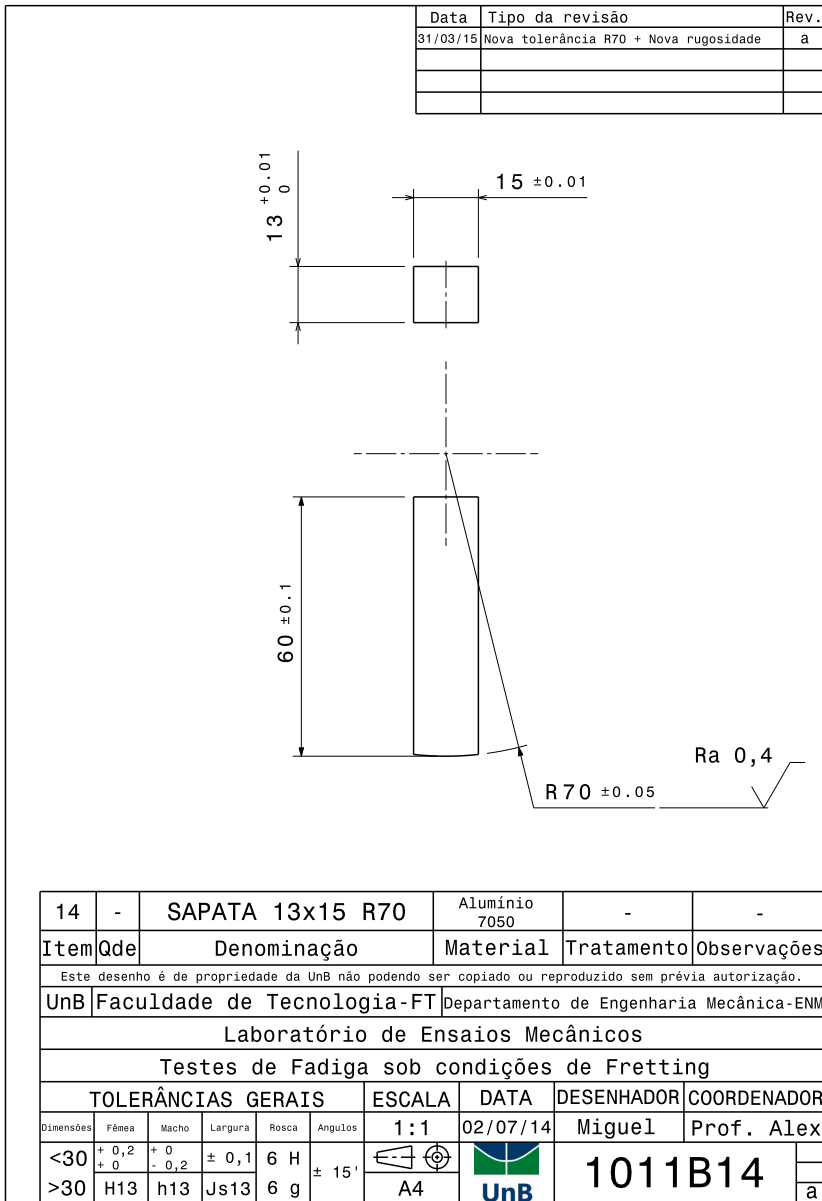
Technical drawing of pad used in fretting fatigue test.
